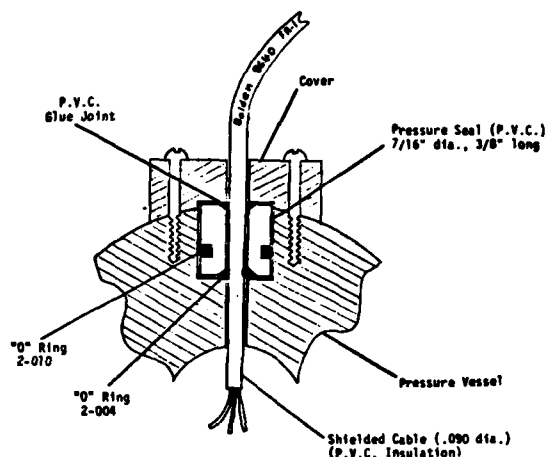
A shielded cable pressure seal mounted in a pressure vessel.
